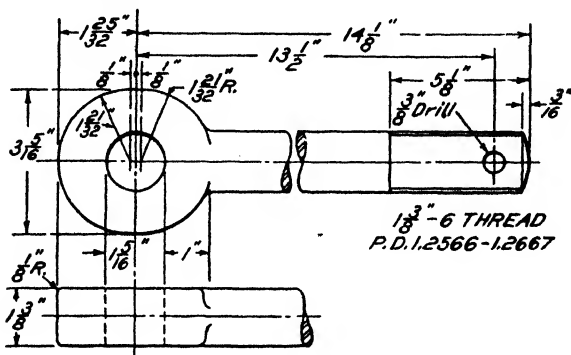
Eyebolts of this type are readily hot headed, but the holes shown are drilled.
